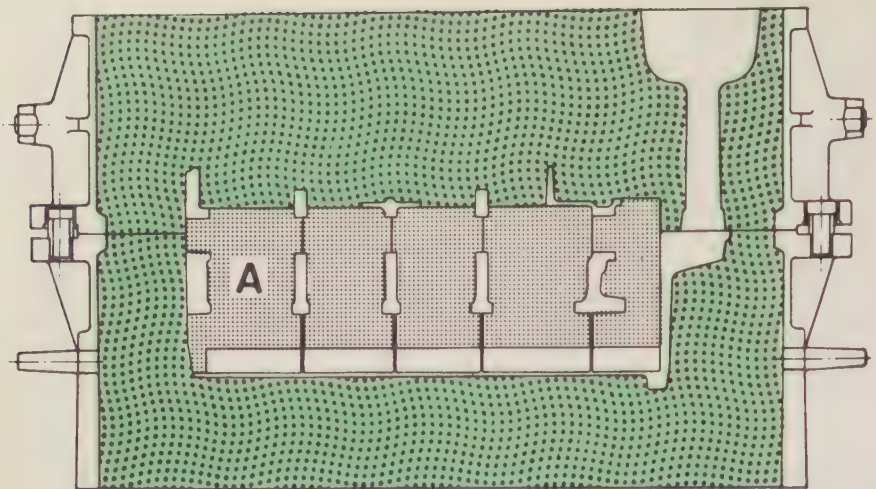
A longitudinal section through the production cylinder-block mold shows that only one core (A), at the rear of the block, is needed to form any external surface. This surface could not be formed by the green sand because the pattern would have back-draft and could not be removed from the drag half of the mold.
